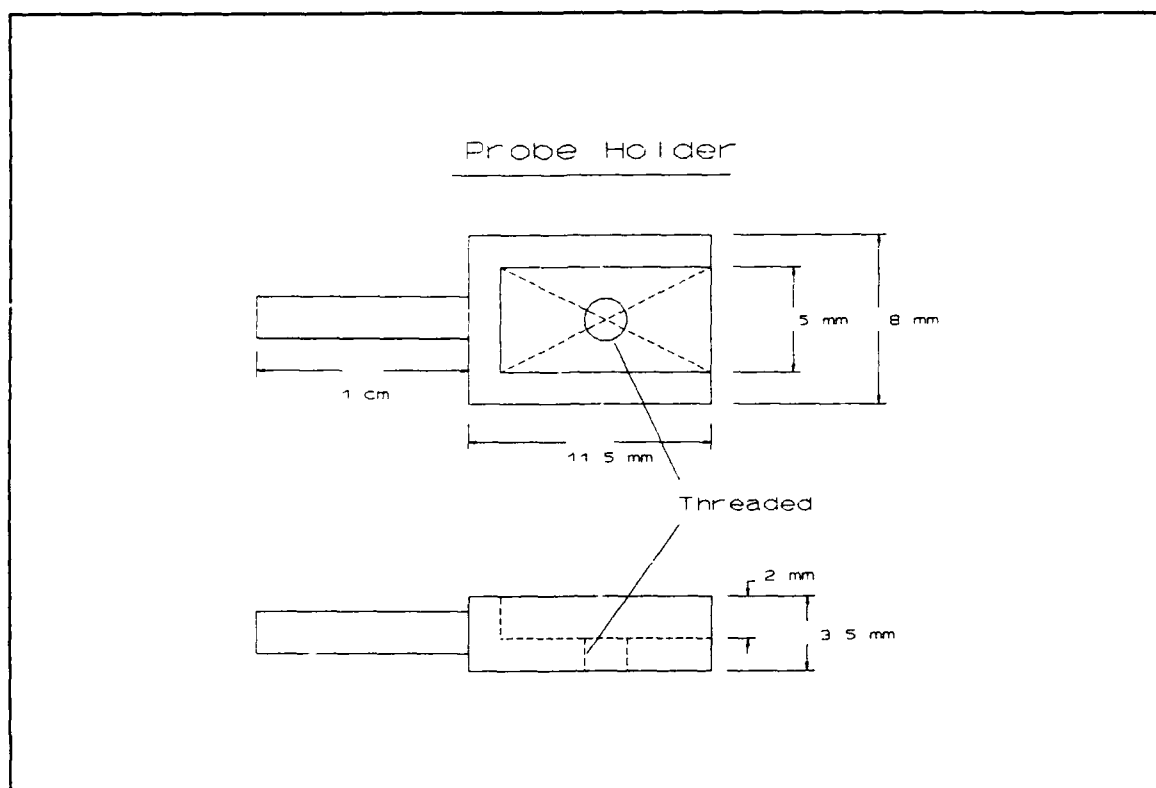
Probe holder for attaching probe arm to Micromanipulator Subassembly.
